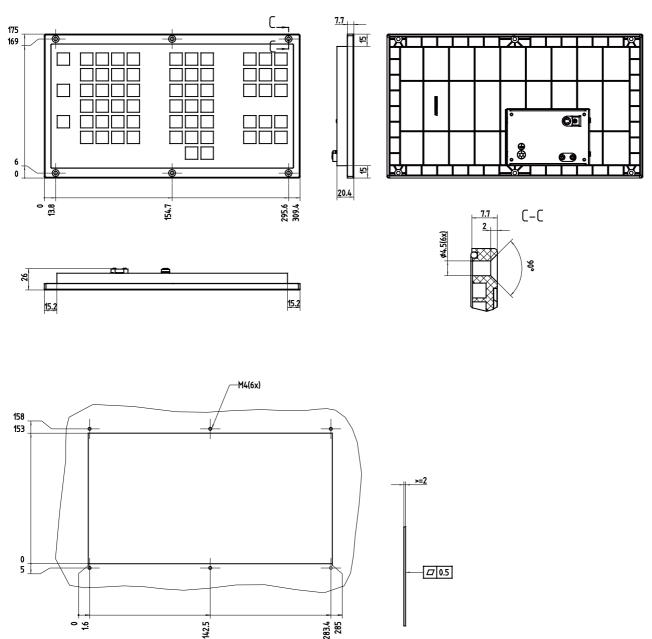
Dimensional drawings and drilling templates of the CNC full keyboard (mounting below the PCU)
